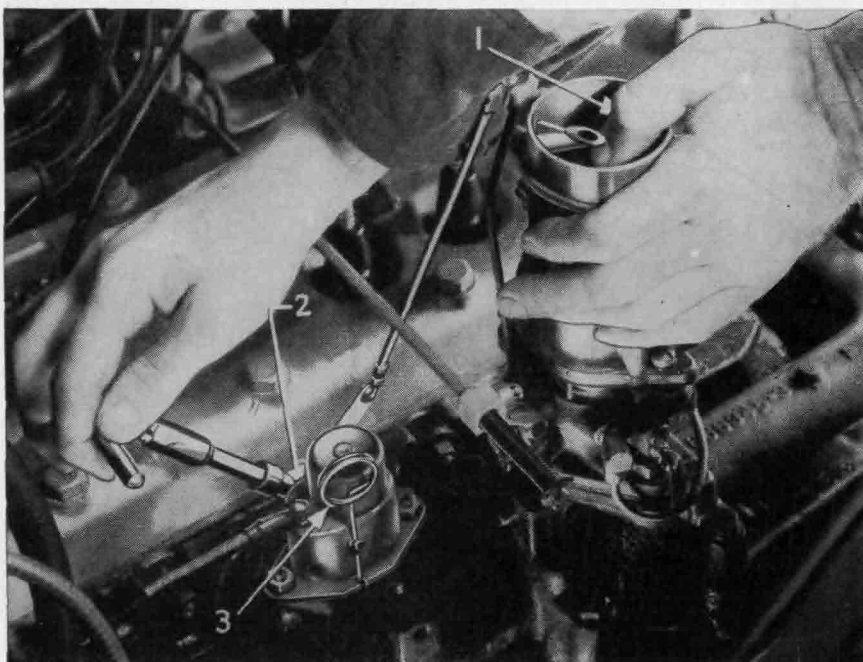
Adjustment of manifold-mounted automatic choke. 1, carburetor choke valve; 2, choke-lever clamp screw; 3, adjusting tool. (*Chrysler Sales Division of Chrysler Corporation*)
